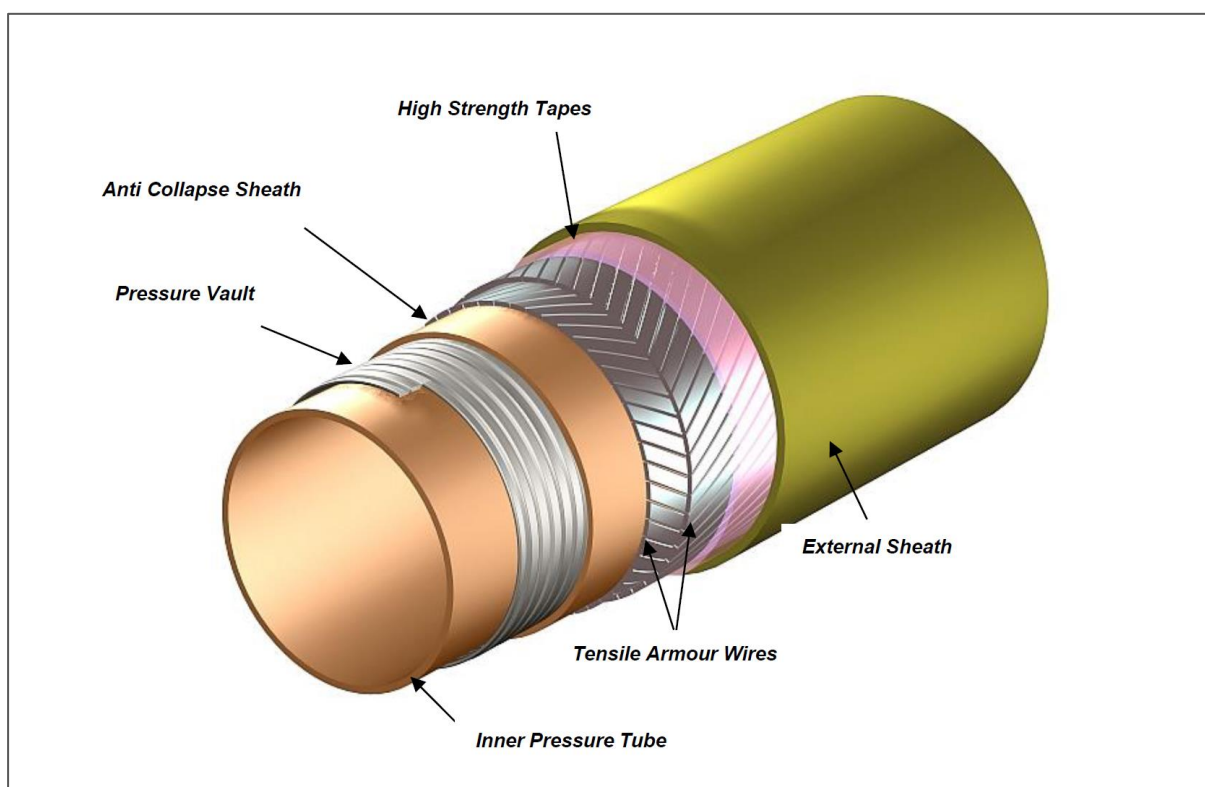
Schematic showing cross section of flowlines to be installed.
